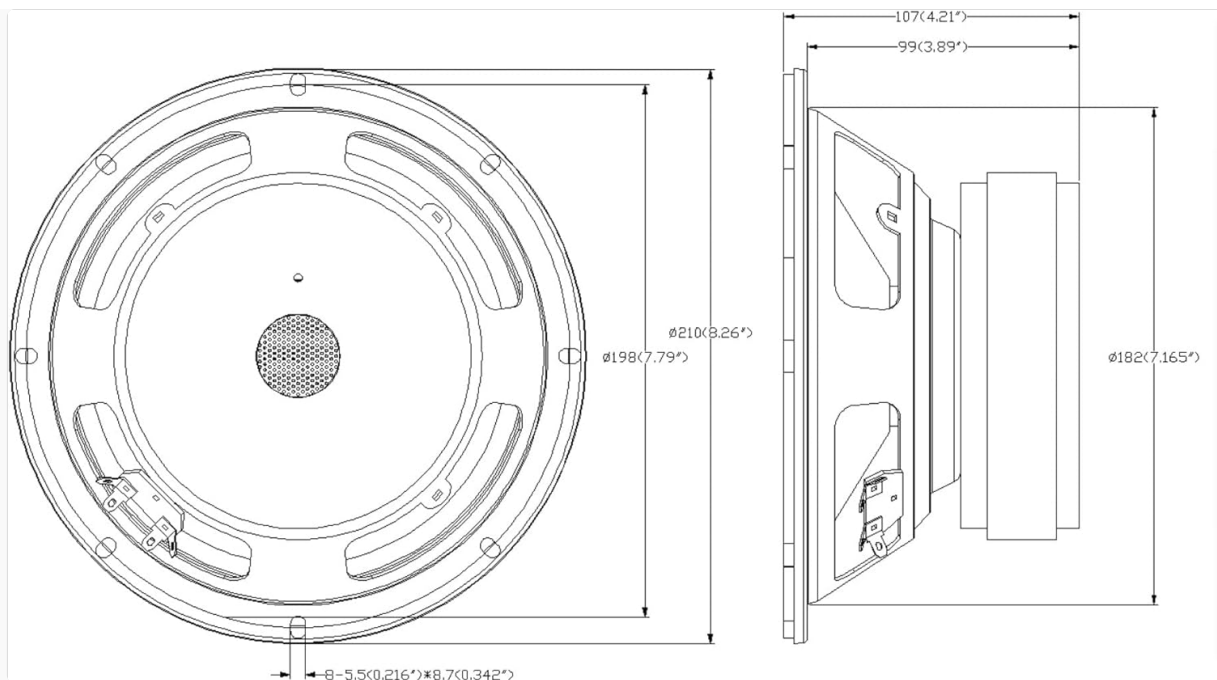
Detailed dimensional drawing of the STLF-08VS woofer, including mounting hole patterns and overall dimensions.
